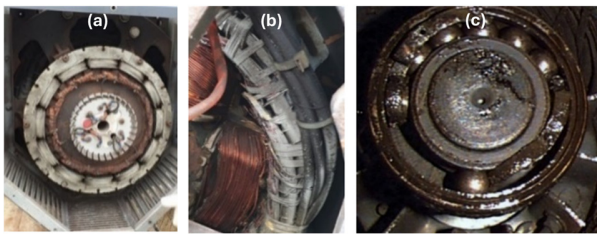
Generator failure caused by bearing failure, showing: (a) front view, (b) burnt stator coil, and (c) damaged roller bearing.
